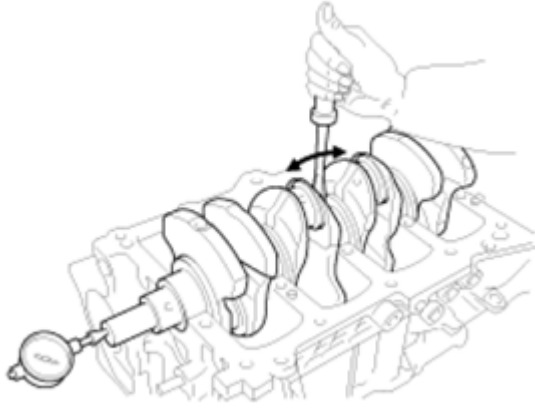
Measuring Thrust Clearance Using Dial Indicator
